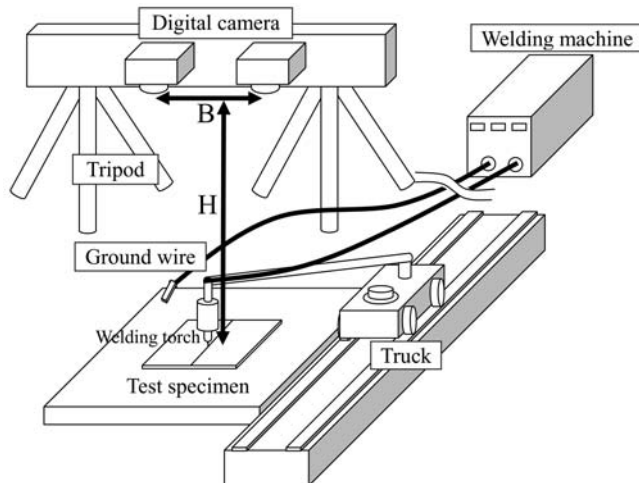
Experimental equipment for welding deformation measurement.
